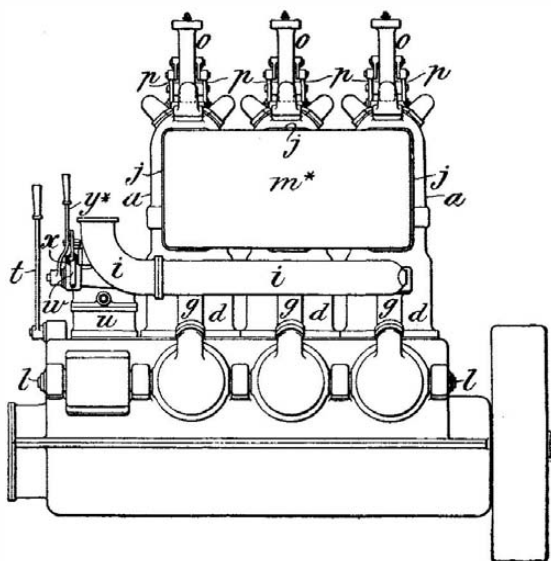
Reversing gear dependent upon changing position of cams relatively to the crank shaft.
